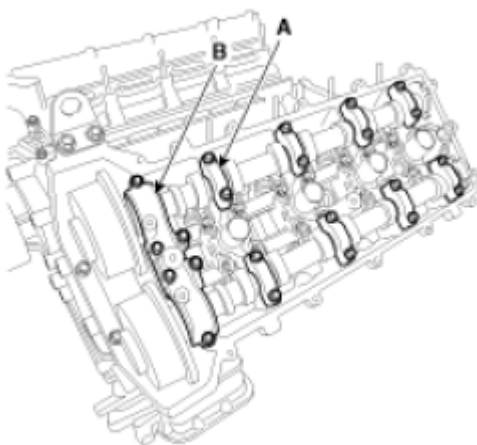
Identifying Bearing Cap And Thrust Bearing Cap
